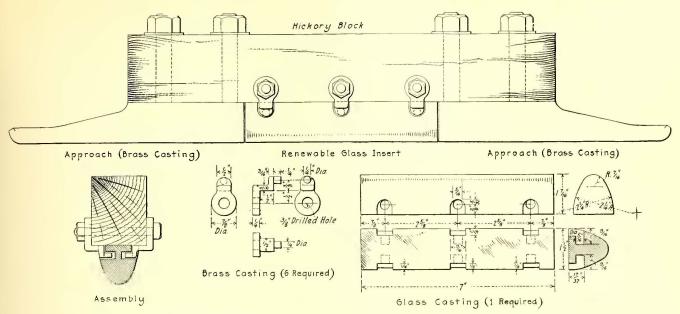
SECTION INSULATOR WITH GLASS INSERT MOUNTED BETWEEN BRASS APPROACHES
